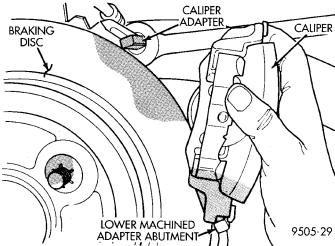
Removing/Installing Caliper Assembly From Adapter
